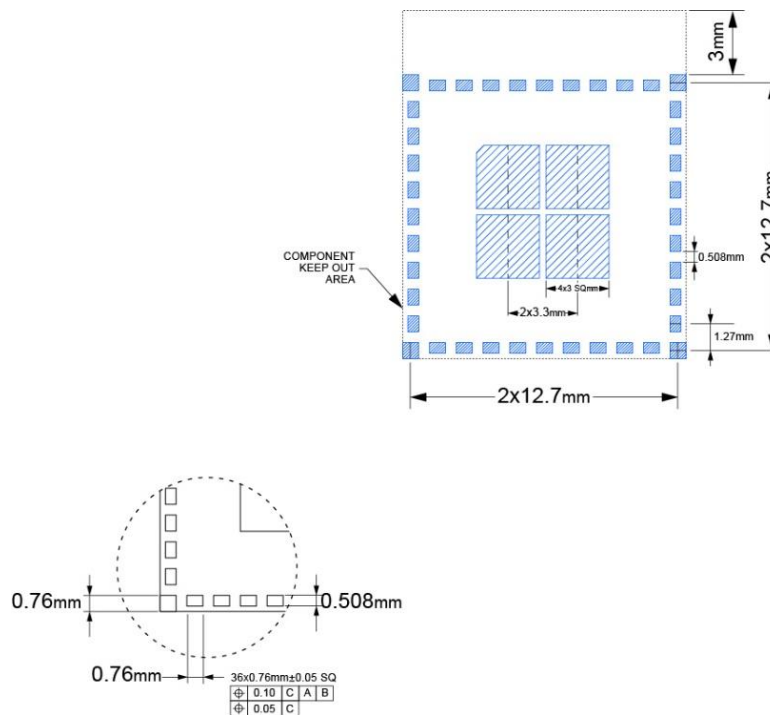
CQM730-0-50-2U PCB Landing Pattern
